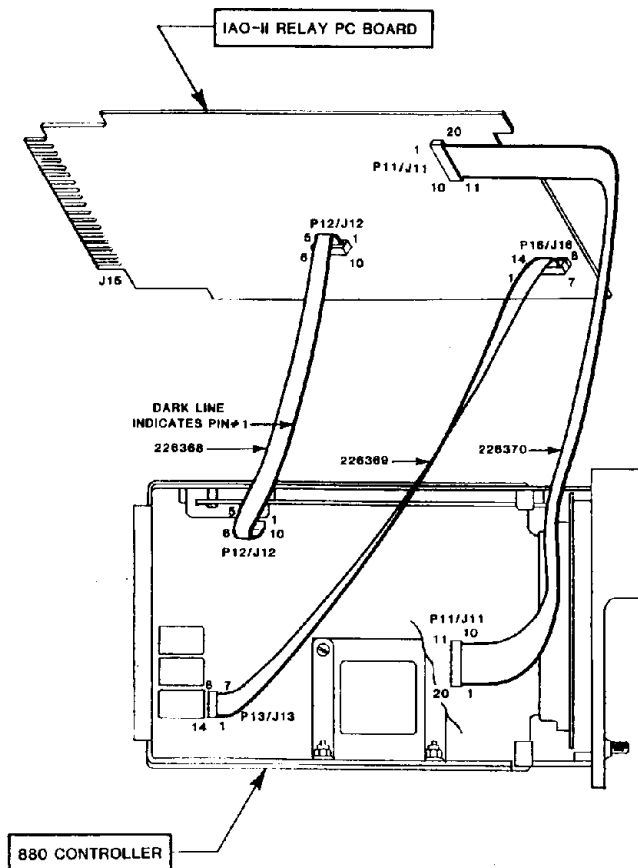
SYSTEM CABLE CONNECTIONS FOR THE IAO-II RELAY PC BOARD ONLY.
